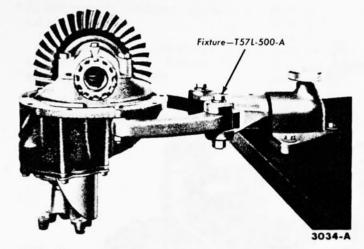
Differential Carrier Mounted in Bench Fixture
